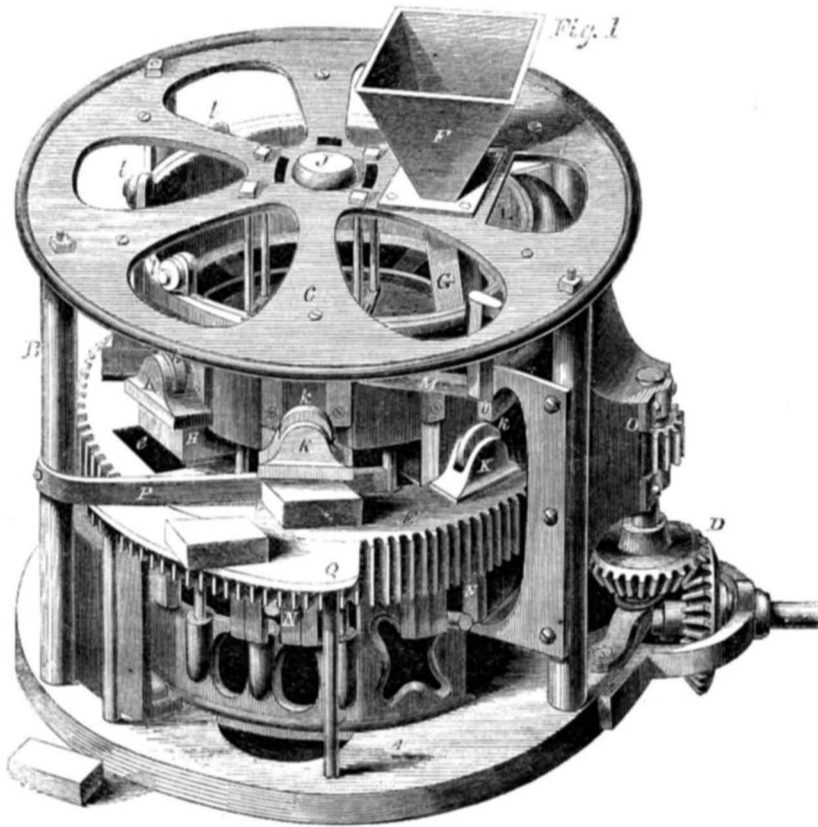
represents a view of the machine, and Fig. 2 a top view of the same with the upper cover or frame removed. The same letters of reference indicate similar parts in each. A is the bed plate, B the standards, and C the top of the machine. D is the gearing which gives motion to the whole. E is a large wheel, in the rim of which are a number of rectangular perforations, *e*, exactly the size of the brick to be manufactured. J is the central shaft of the machine. Having now given an outline of the principal parts, we will proceed to describe, first, the feeding device, and then the press or brick-making apparatus.
